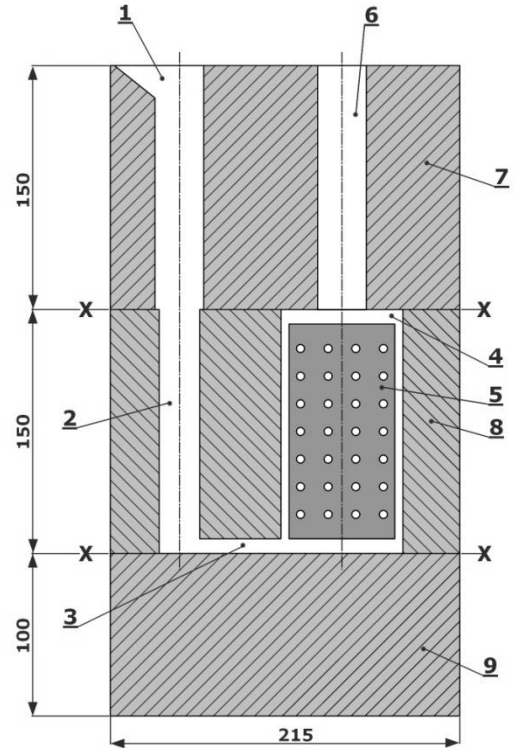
Diagram of mould for skeleton casting: 1 – pouring basin, 2 – getting system, 3 – ingate, 4 – mould cavity, 5 – skeleton casting and core, 6 – over flow, 7 – upper part of the mould, 8 – central part of the mould, 9 – lower part of the mould
